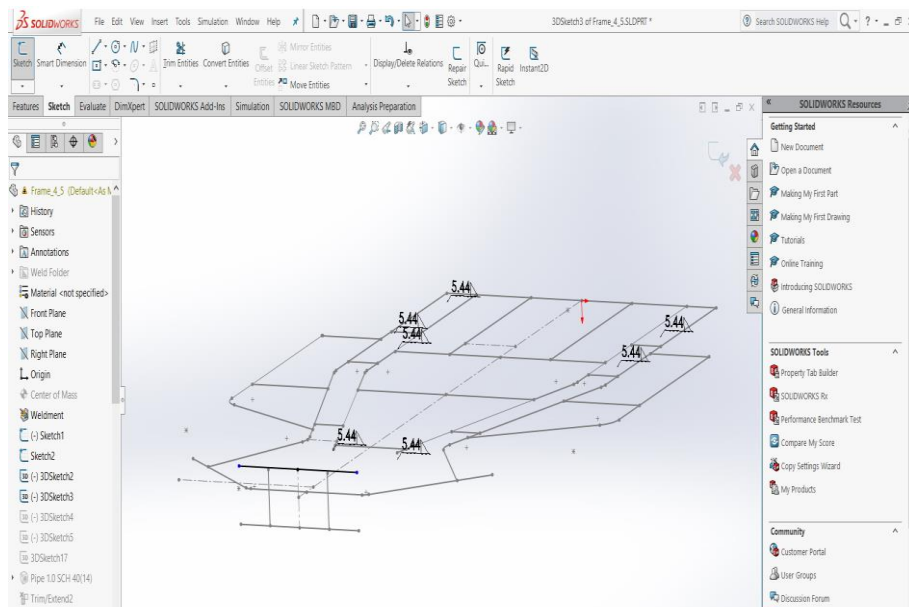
(c) - Modelling of the second frame (Dimension-III)
